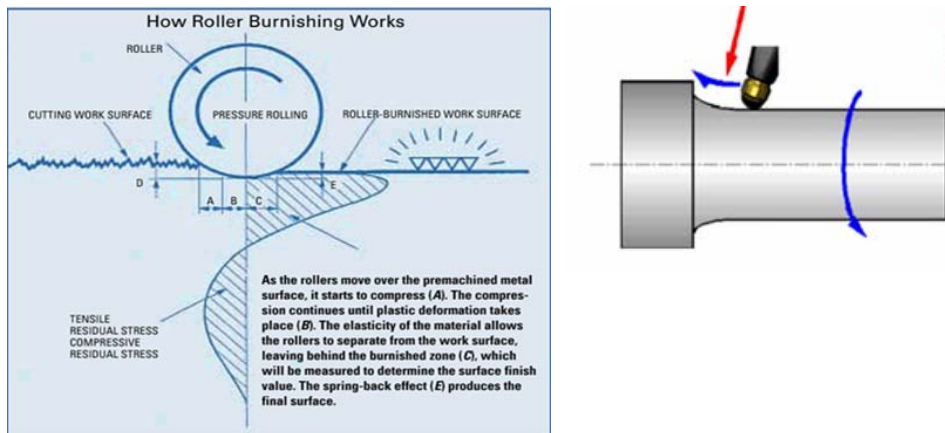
Schematic illustration of roller burnishing principle through ECOROL technology
